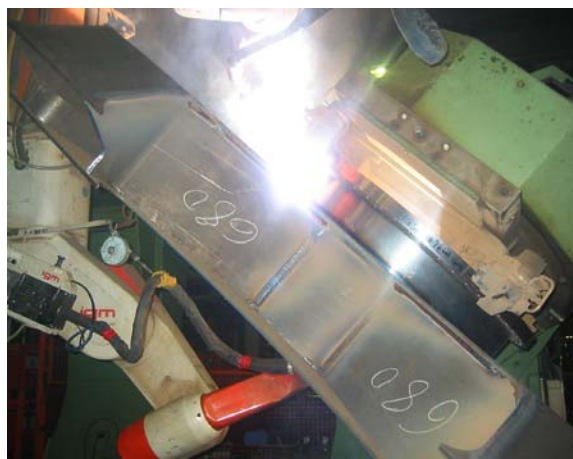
High-performance welding with a 2.4 mm flux cored wire (deposition rate 25.5 kg/h).
